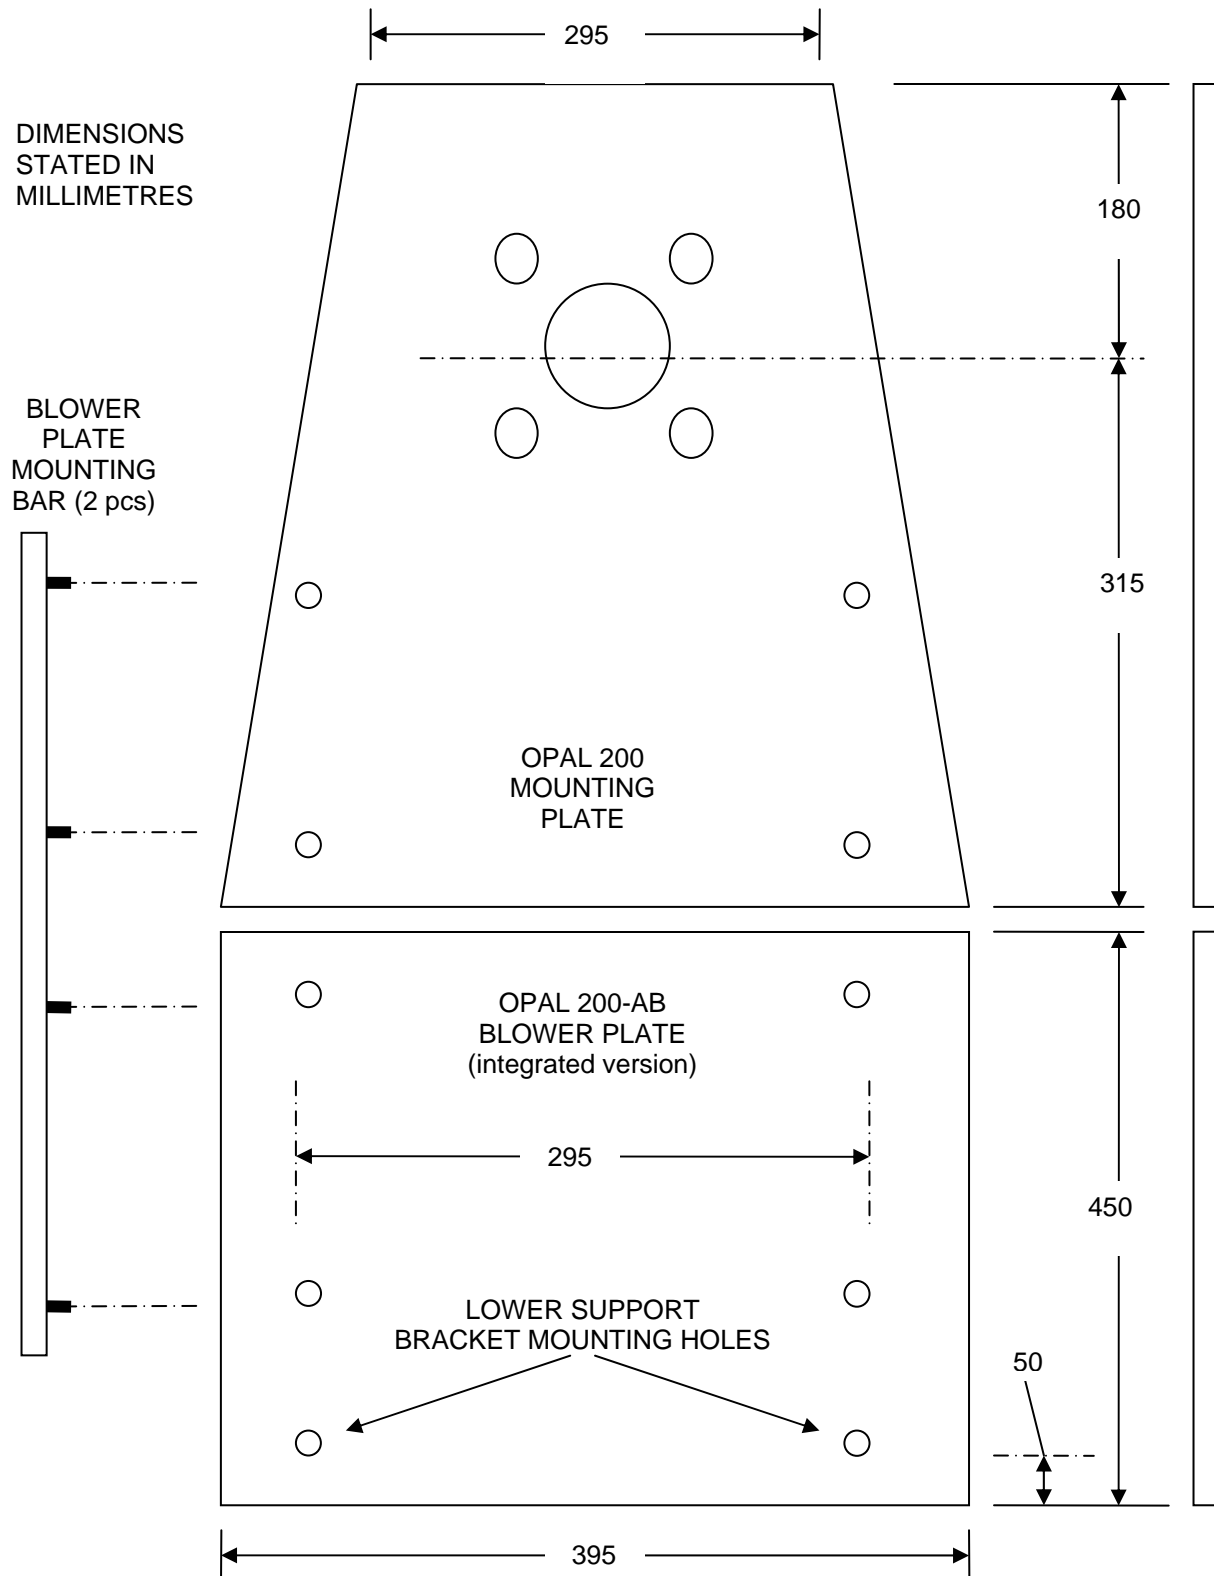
INTEGRATED PURGE BLOWER COVER DIMENSIONS
